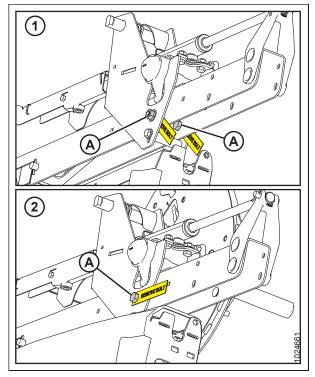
Right Reel Arm 1 - Single Reel 2 - Double Reel
